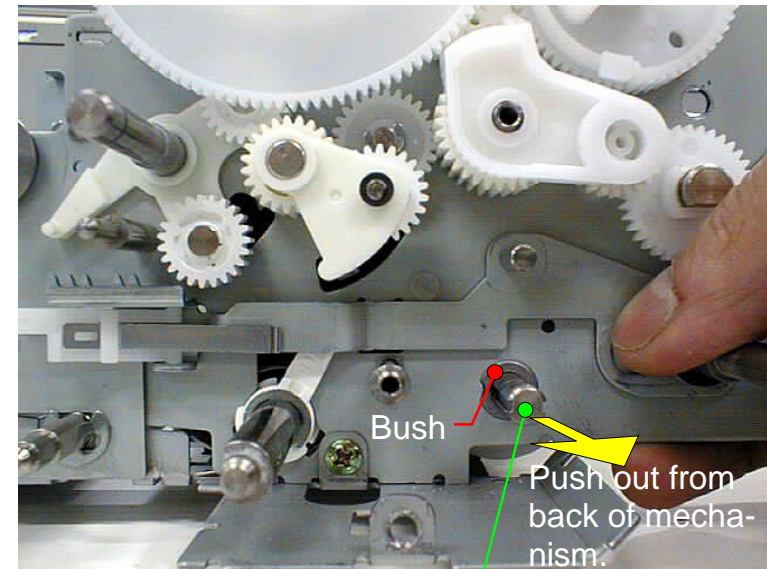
Installing "Hopper Lock Transmission Gear Assembly"
